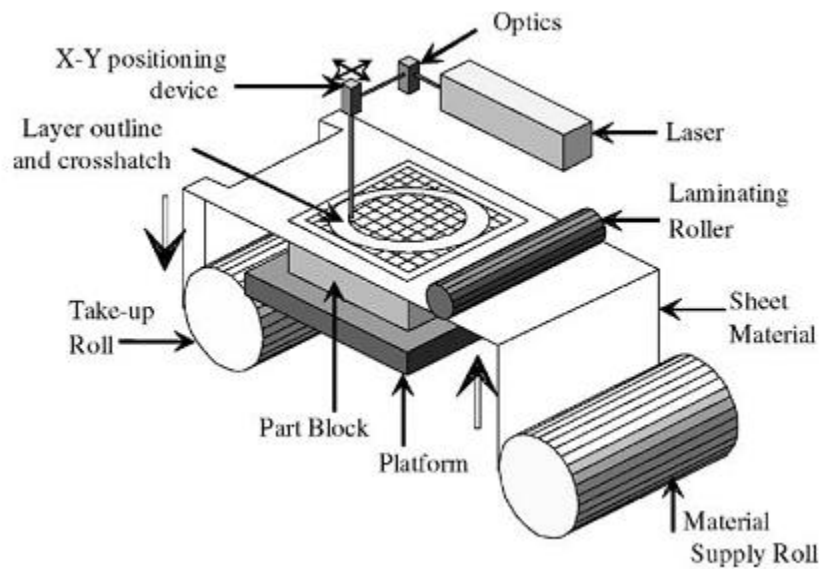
Schematic of the laminated object manufacturing technique. The material is rolled into the build area where the laminating roller sets the adhesive. The laser cuts the part out of the sheet material. The platform lowers and the process continues [171].
